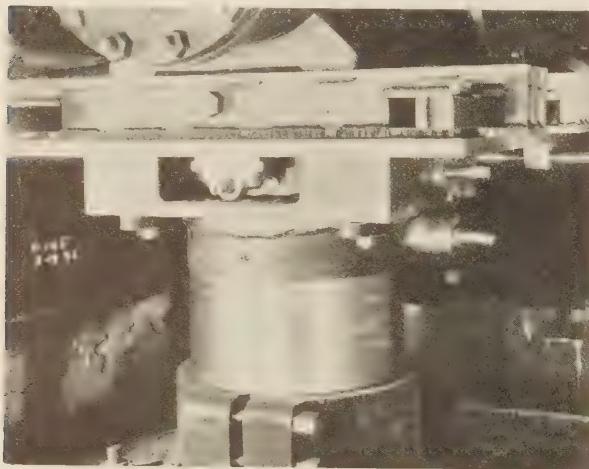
ADJUSTABLE BASE FOR MOUNTING TEST UNITS
